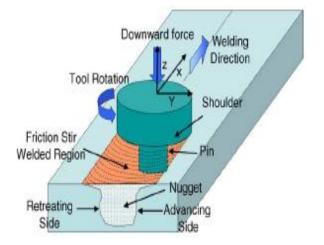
Schematic Diagram of Friction Stir Welding process [1].
